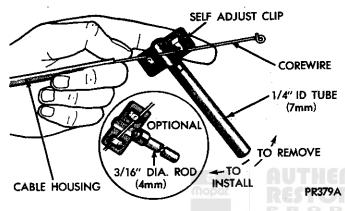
Removing or Installing Self-Adjust Clip INSTALLATION
